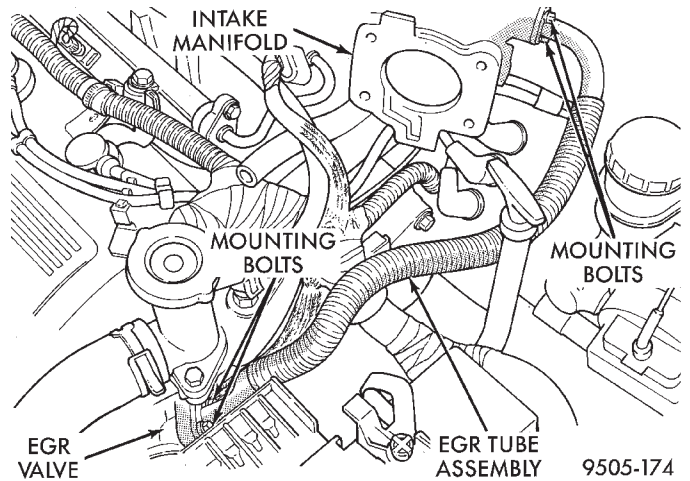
EGR Tube Attachment To Intake Manifold And EGR Valve
